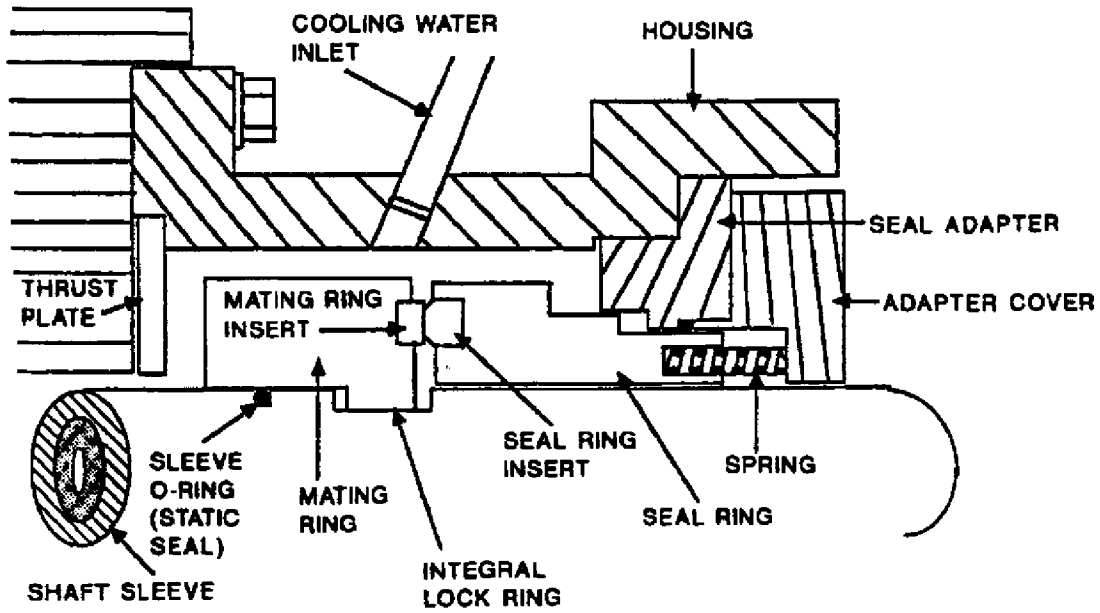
Typical SSN 688 Class Primary Shaft Seal Assembly
